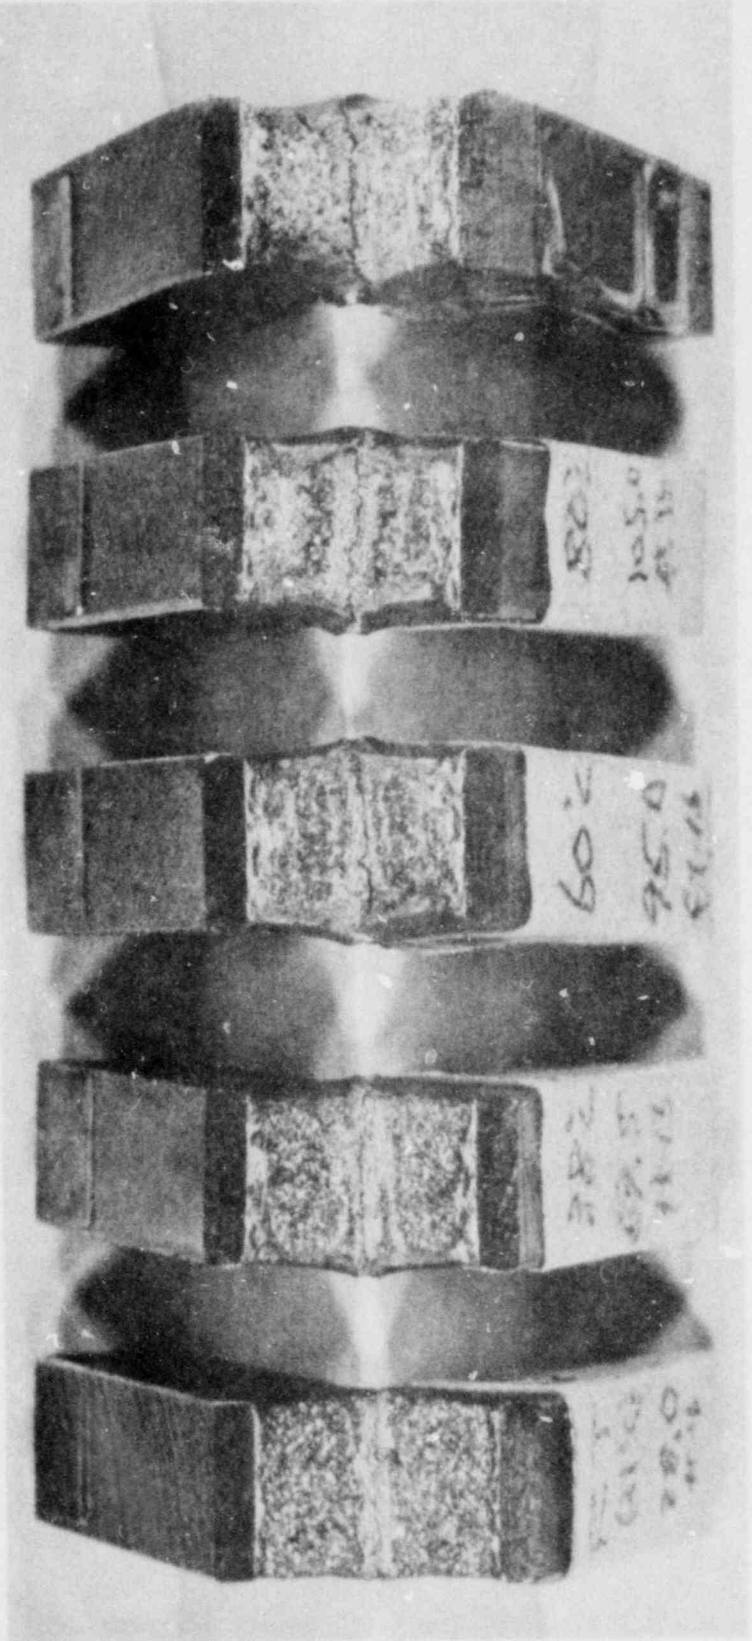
Fracture surface appearances of standard CVN specimens of A36.
